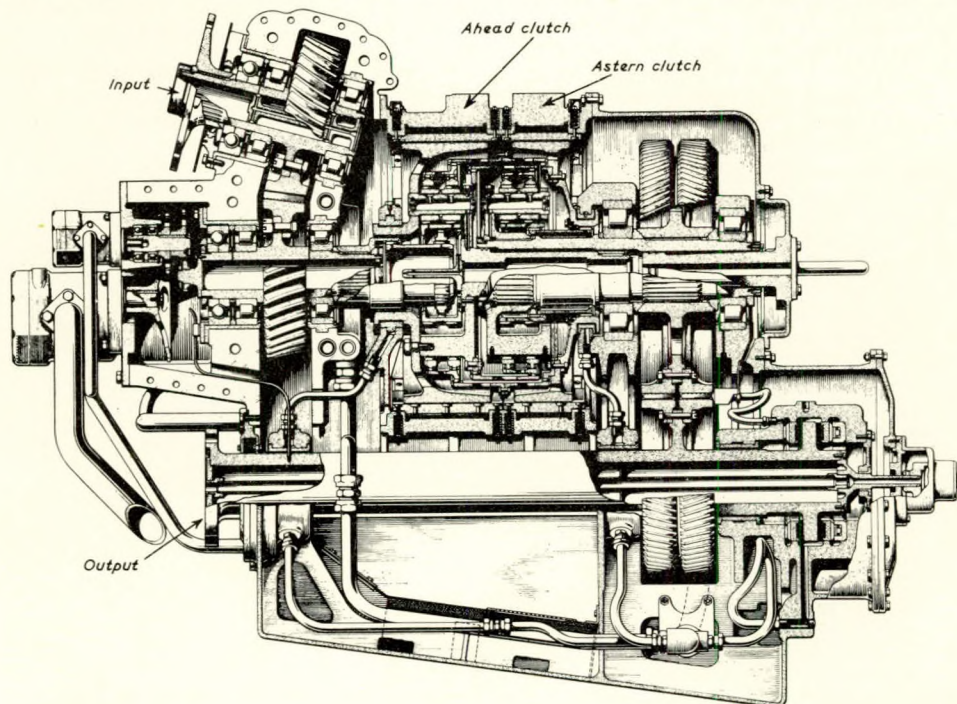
Brave Class fast patrol boat's reverse reduction gear
